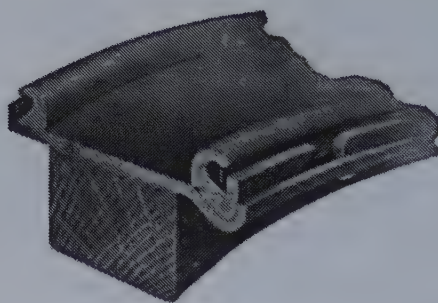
The Standard Universal Quick Detachable Rim, Type 2
